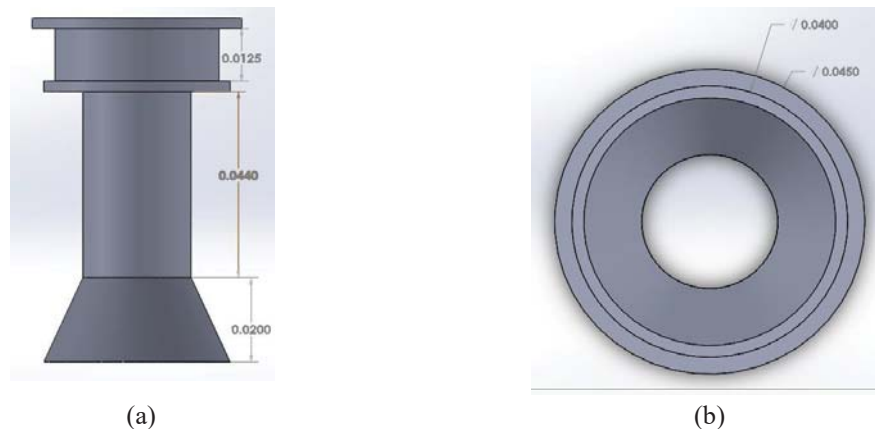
(a) Nozzle design (front view), (b) Nozzle design (top view) unit in mm
